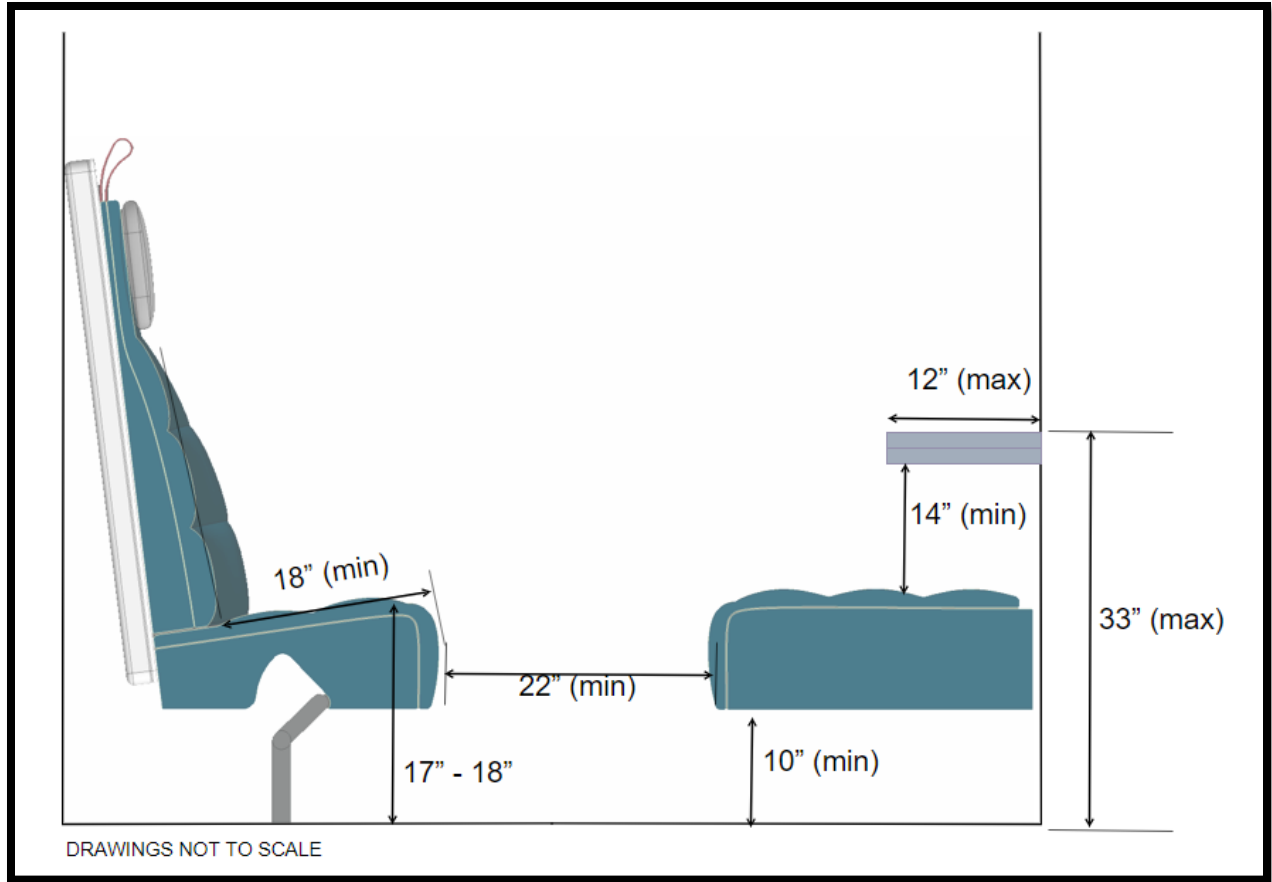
Crew Sleeper Cabin Seat Dimensions
